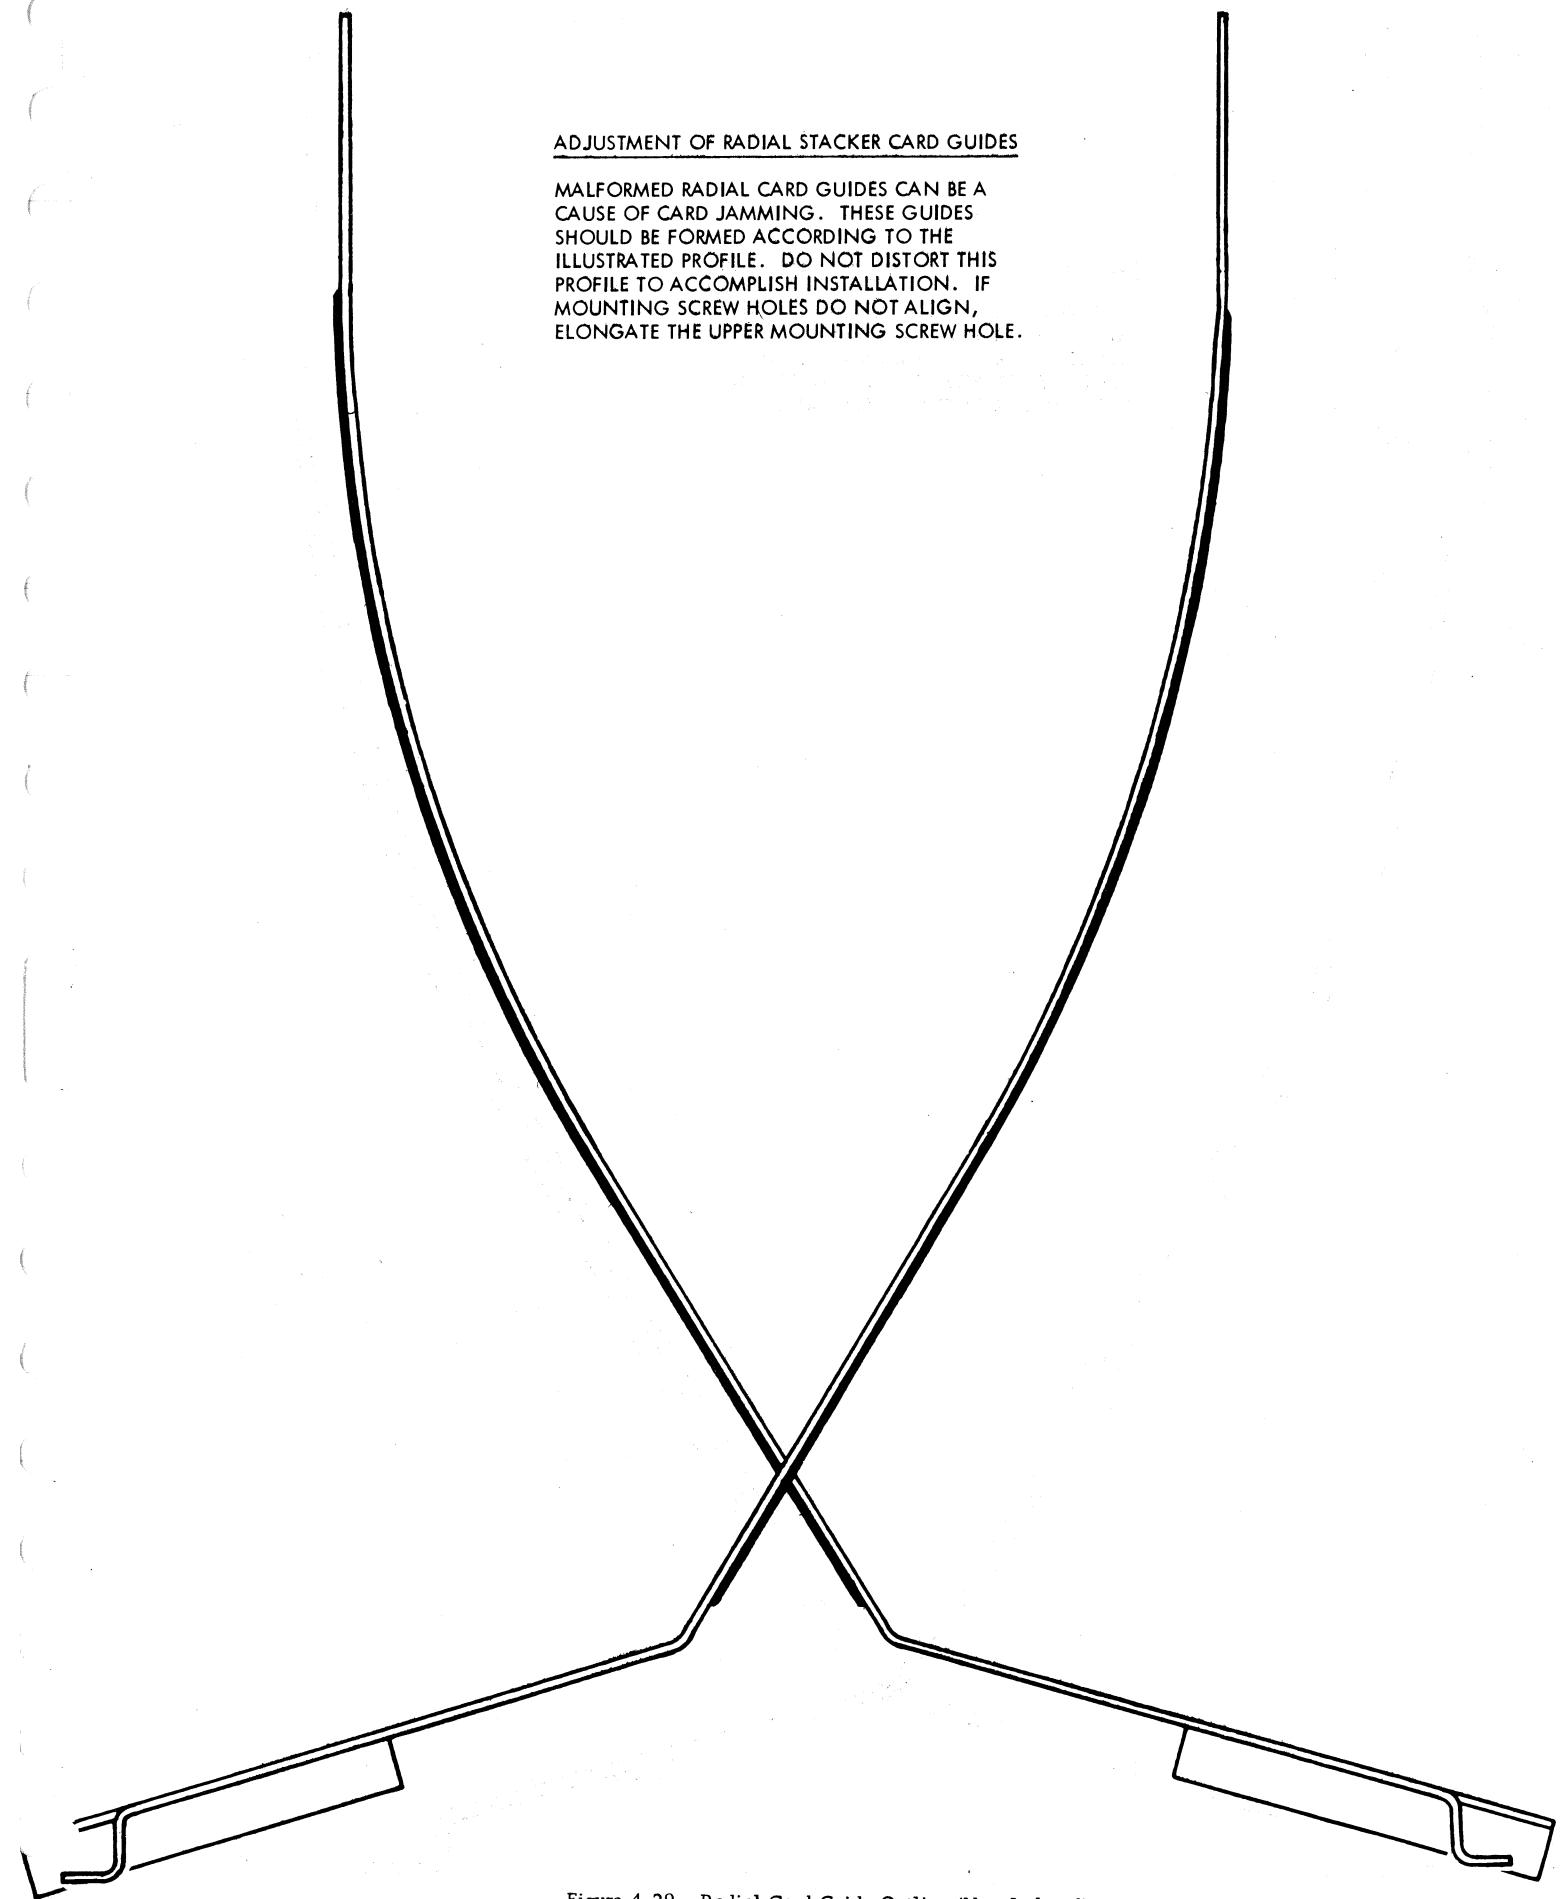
Radial Card Guide Outline (Non-Isolated)
